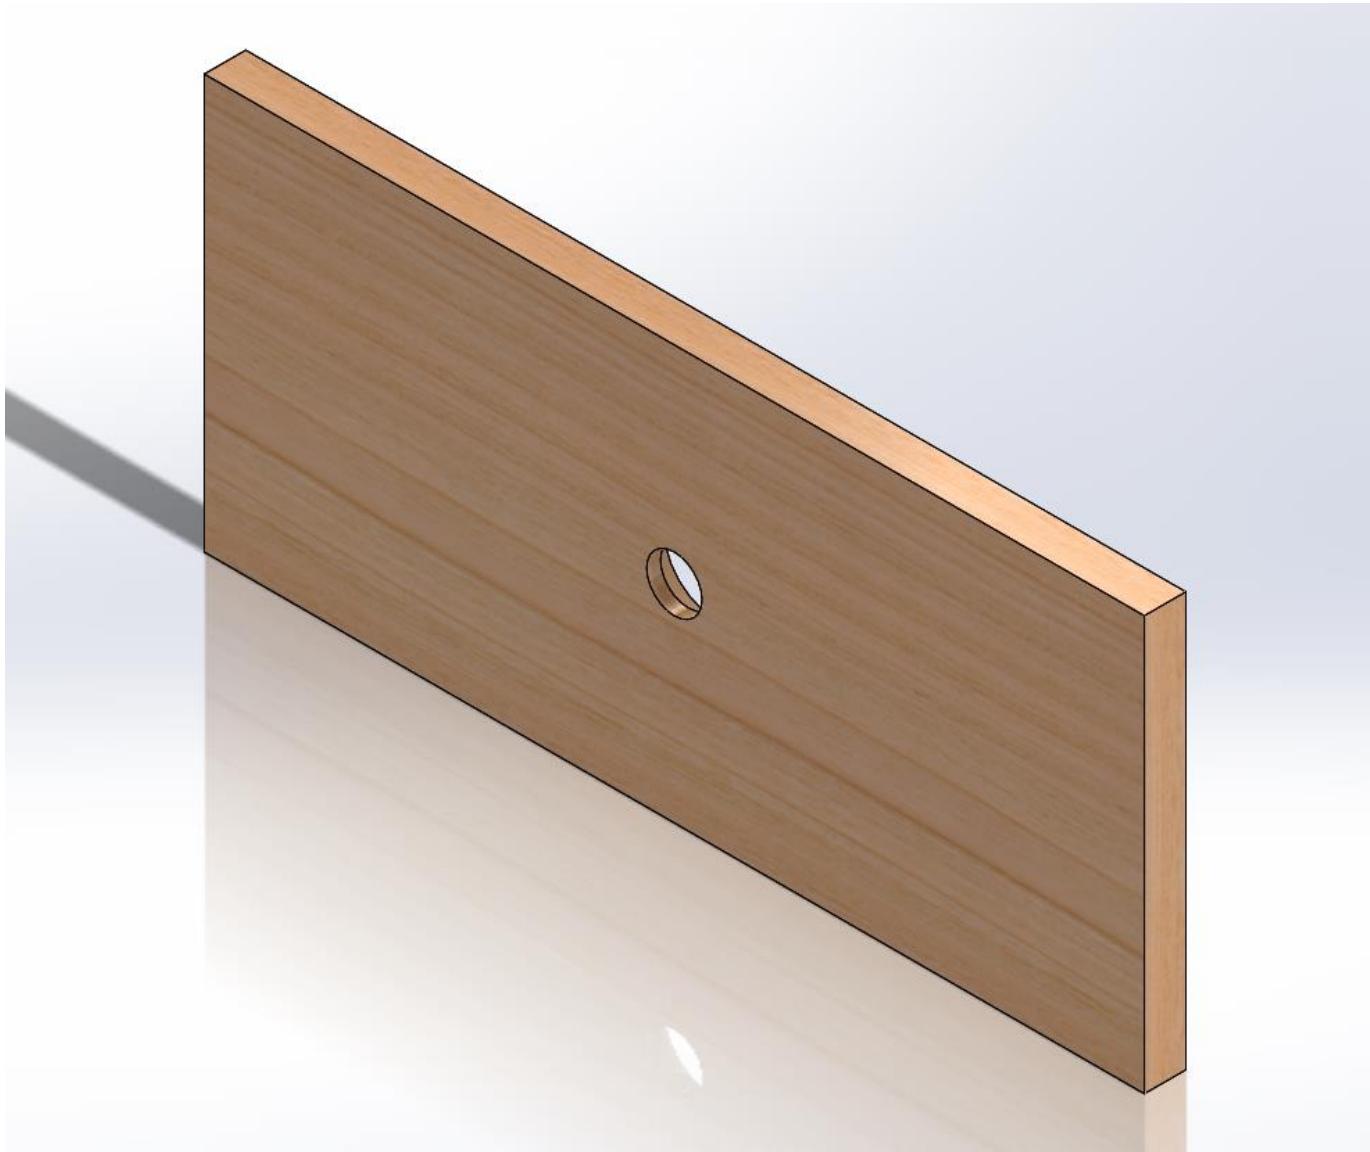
Part 1020 (Wooden Board) CAD Drawing
